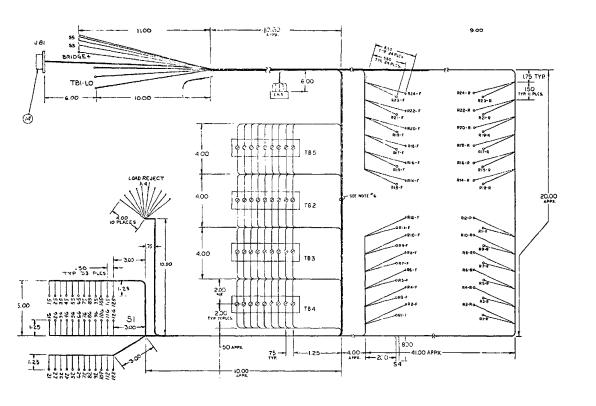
Electric Heater Control Box, Wiring Harness (Sheet 1 of 2)
